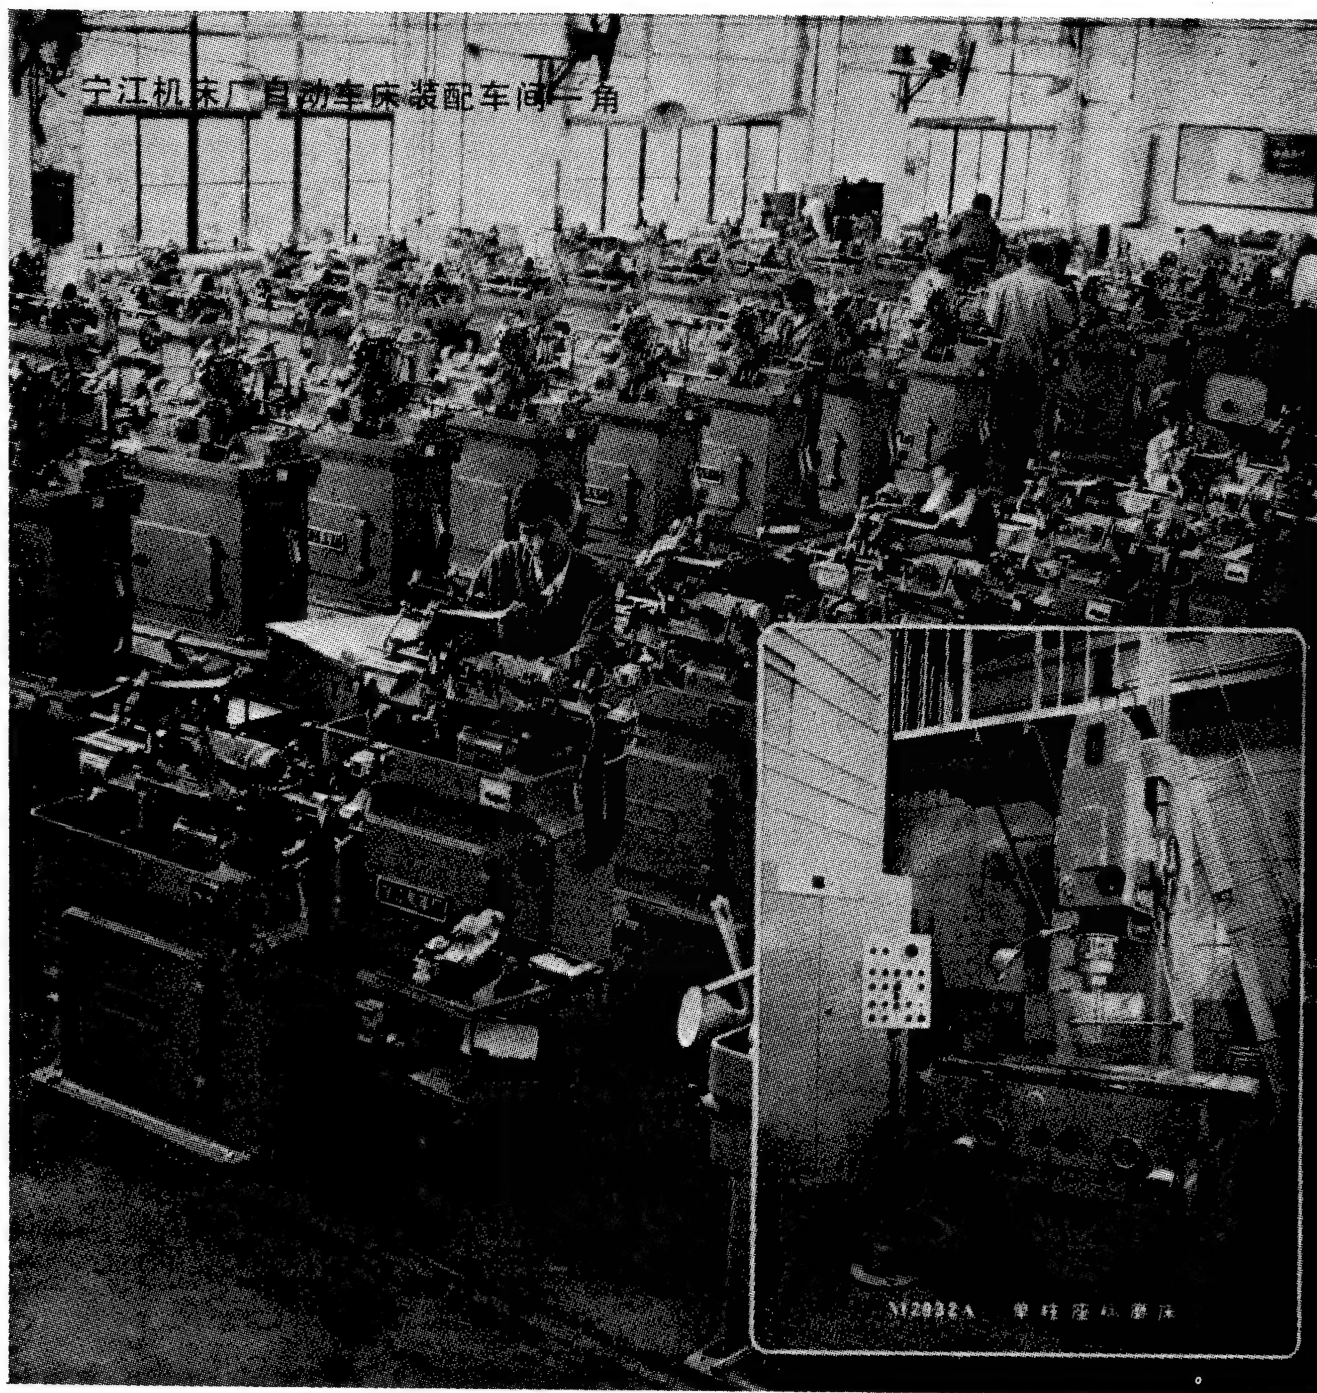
A sectional view of the Ningjiang Machine Tool Plant's automatic lathe assembly shop
